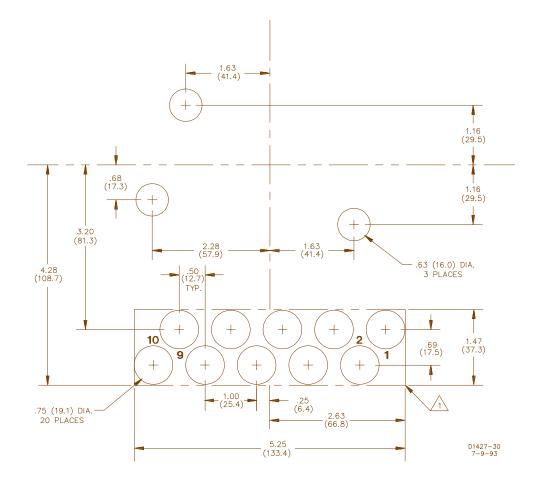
S1 Case, Single-Ended, Panel Drilling Diagram, Rear View
